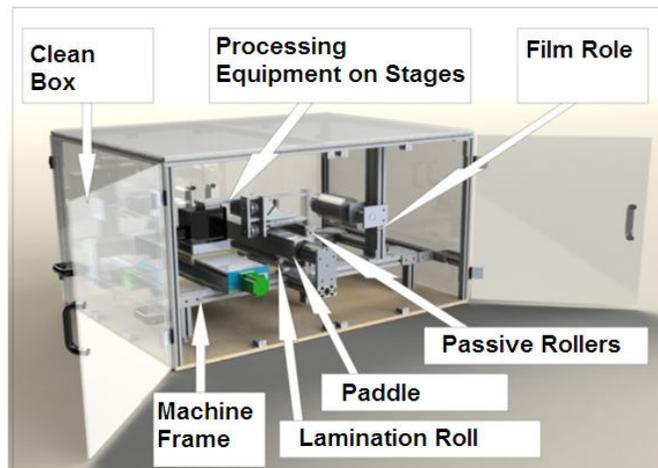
SolidWorks Rendering of Actuator Fabrication Machine
